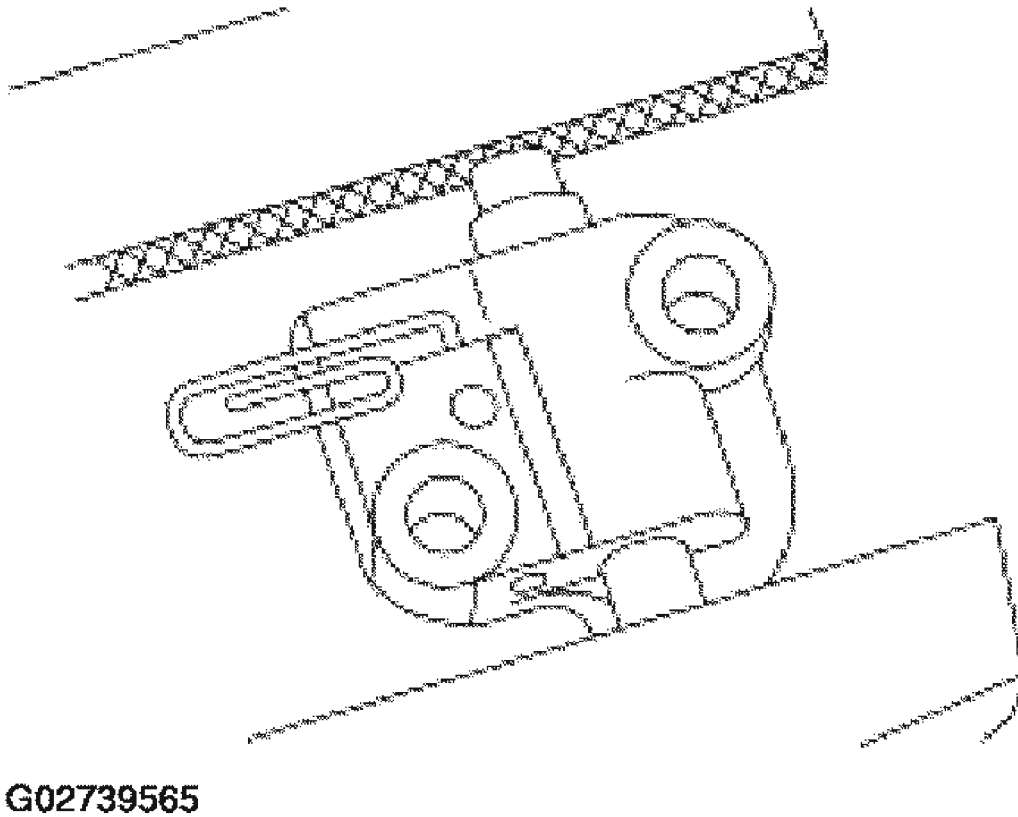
Holding Chain Tensioner Ratchet Lock Mechanism
